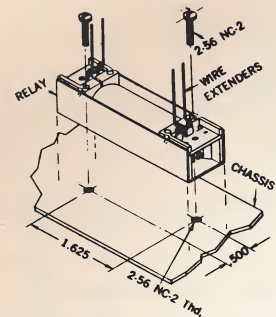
Back-of-Panel mounting. Use of two diagonally opposed holes is recommended. The wire extenders can be furnished on special order.
